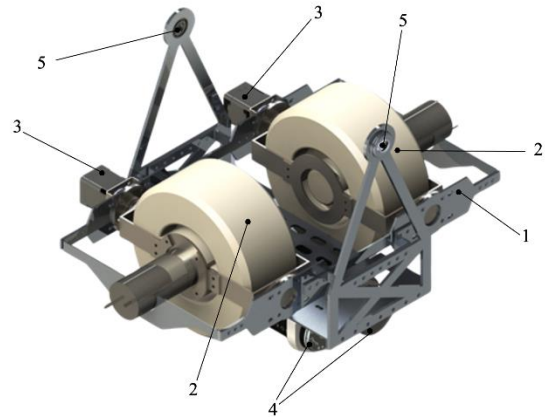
Inherited pendulum design from [2]. 1) Pendulum structure; 2) CMG groups; 3) Stepper
